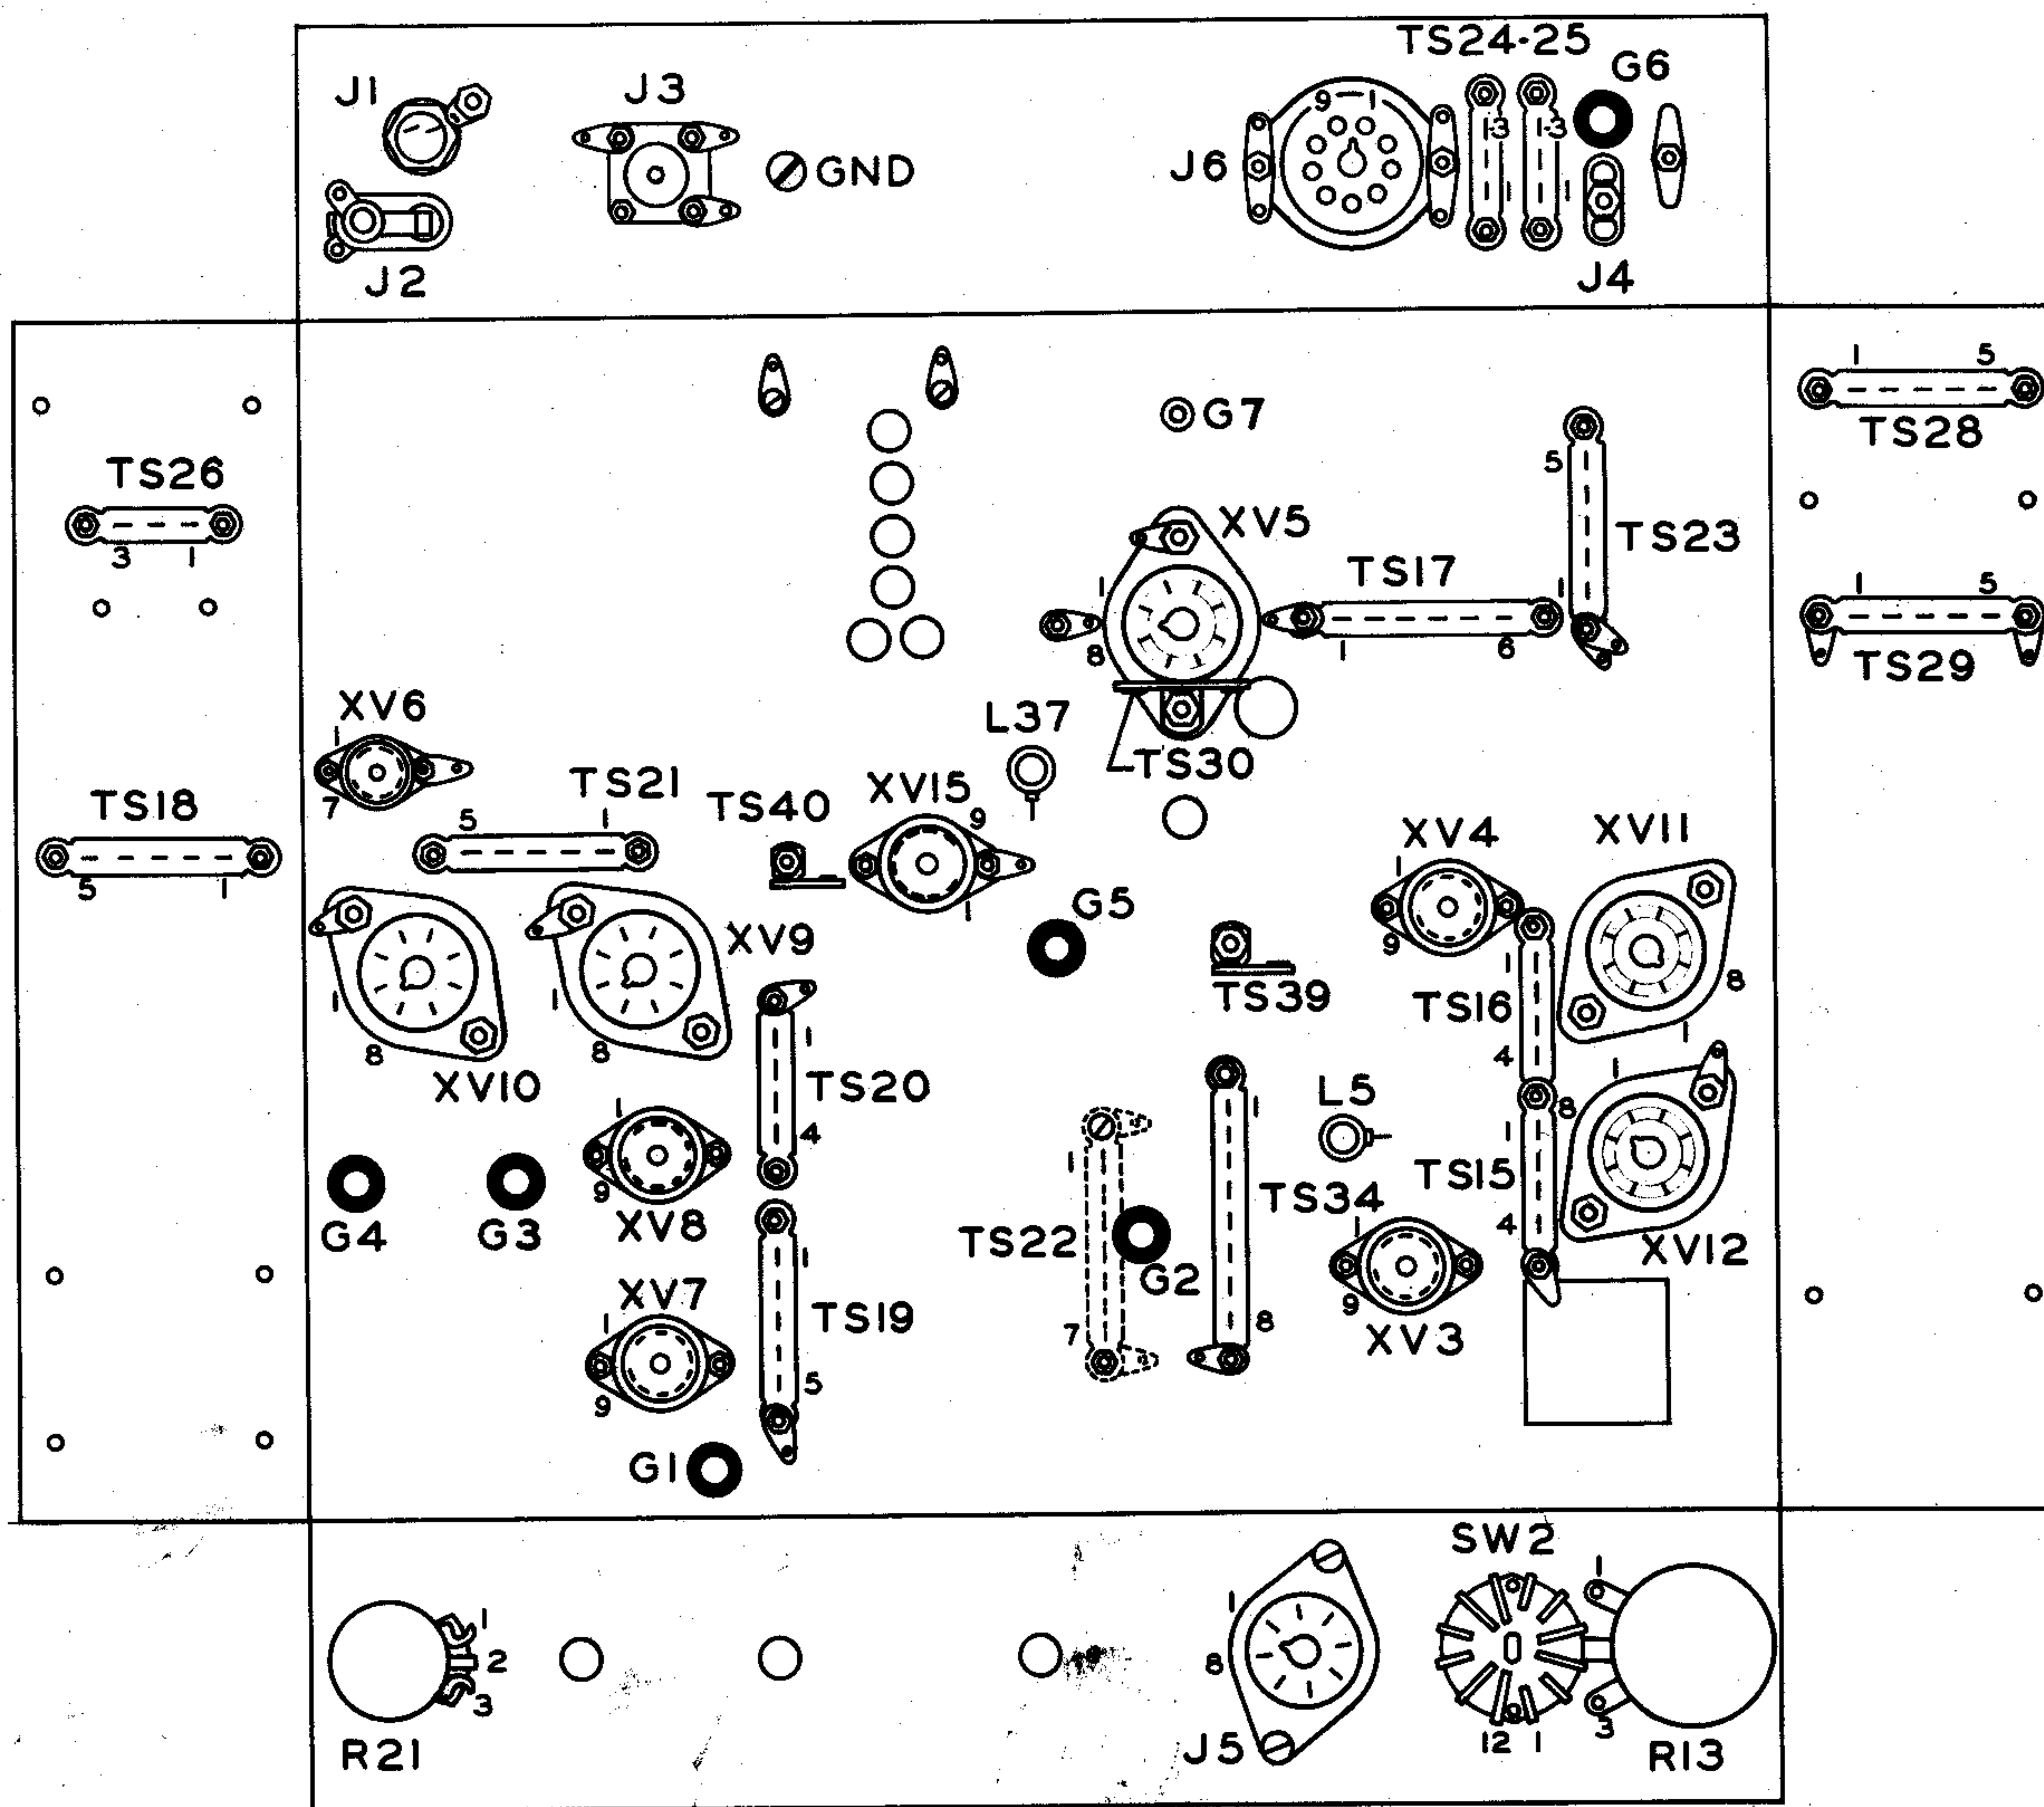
A-BOTTOM VIEW OF CHASSIS
